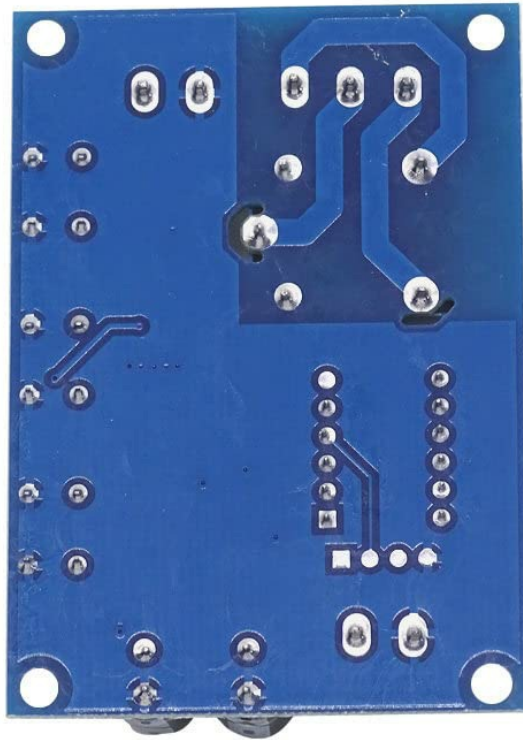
Bottom view of the XH-M608 module, illustrating the PCB traces and mounting holes.
